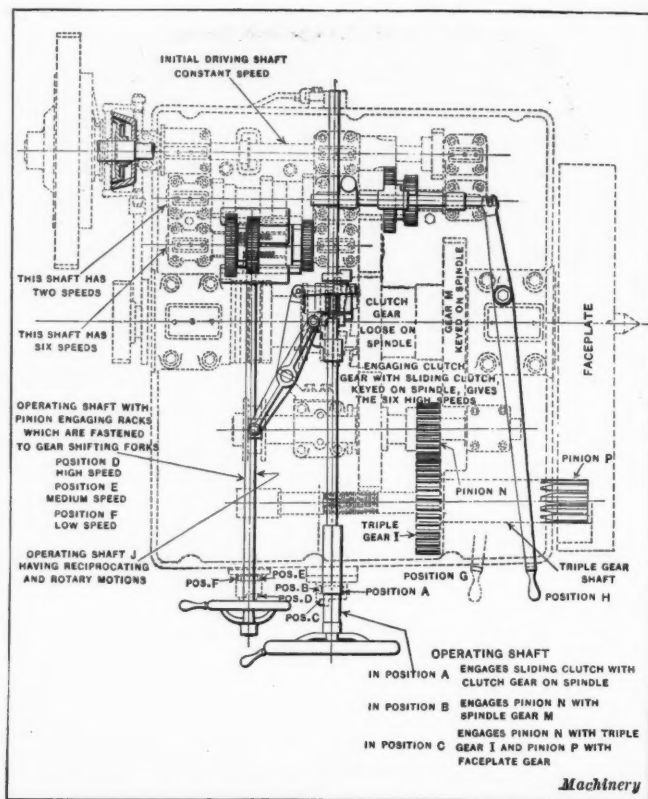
Arrangement of Gearing in Head of Putnam 42-inch Lathe
